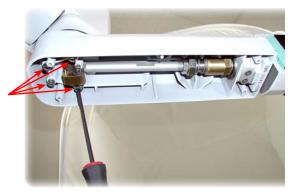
Screws Securing Lower Tray Arm to Upper Tray Arm
